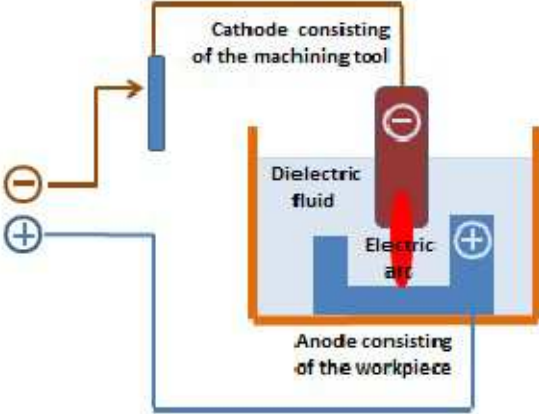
Principle of EDM without contact between the machining tool and the workpiece
